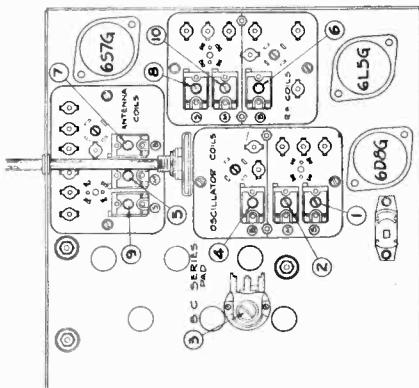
BOTTOM VIEW SHOWING TRIMMERS
